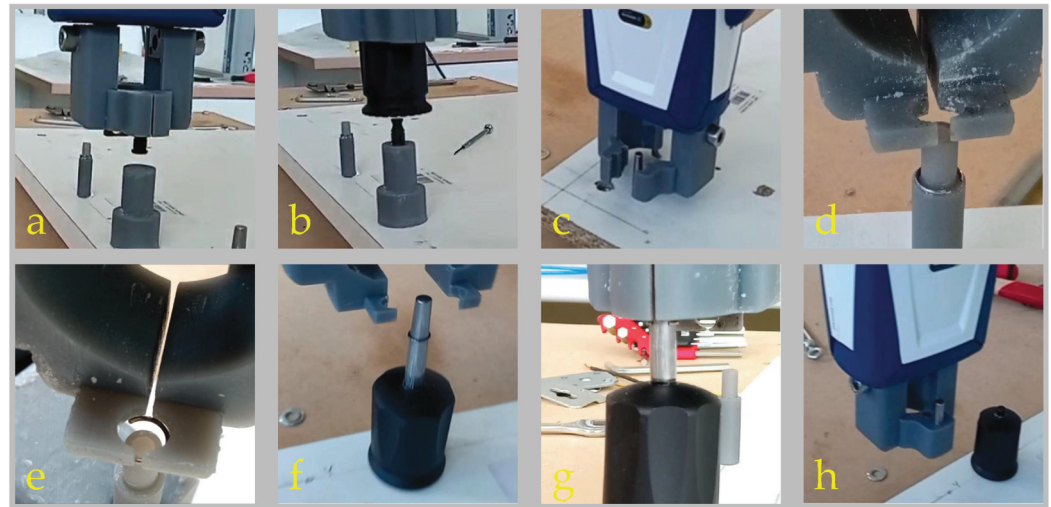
Automated assembly sequence: (a) positioning of the CAP, (b) positioning of the MAG, (c) gripping of the guiding cone (CONE) by the robot, (d) detail of the approach position for gripping the RING, (e) close-up view of the RING correctly gripped by the robot, (f) positioning stage of the RING in preparation for insertion, (g) insertion of the ring into its housing assisted by the CONE, and (h) removal of the CONE after assembly, signaling the preparation of the component for subsequent palletization.
